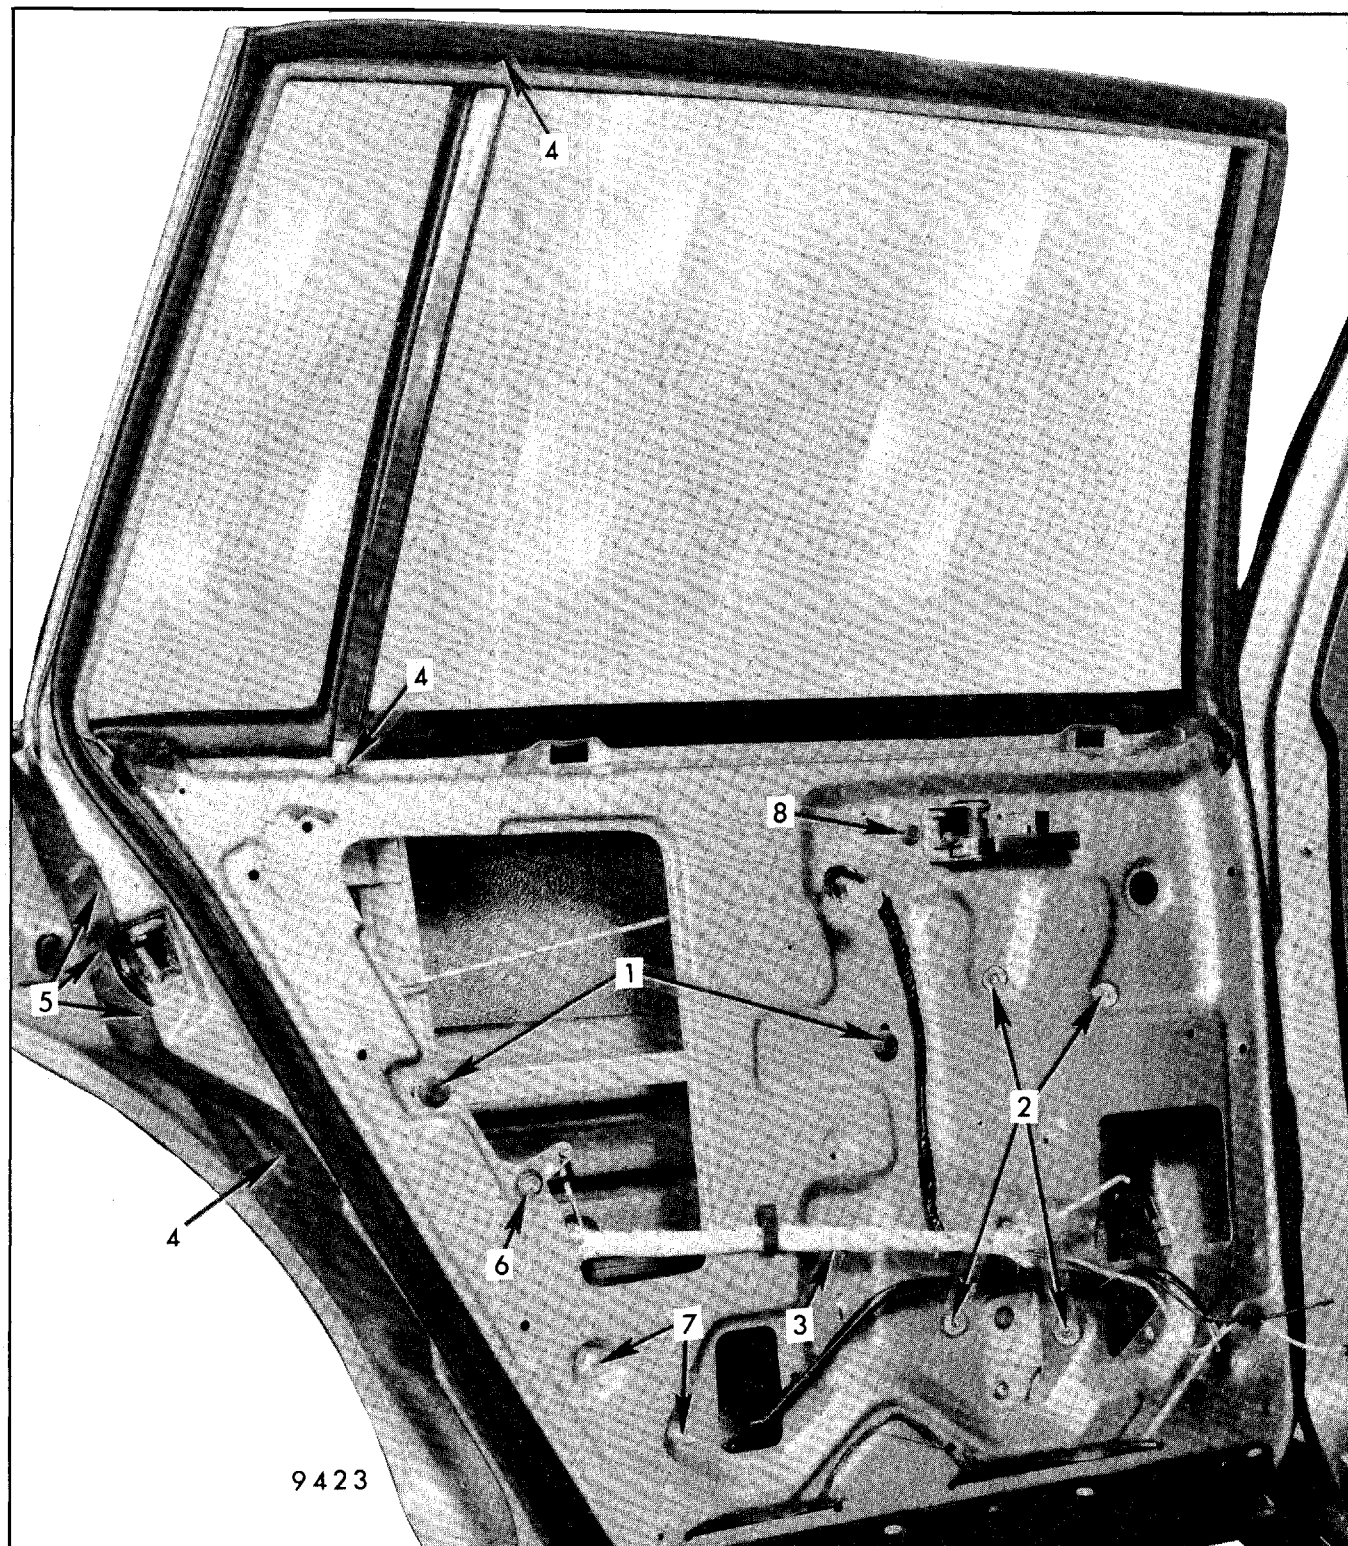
Rear Door Hardware Attachments - "K" Styles
